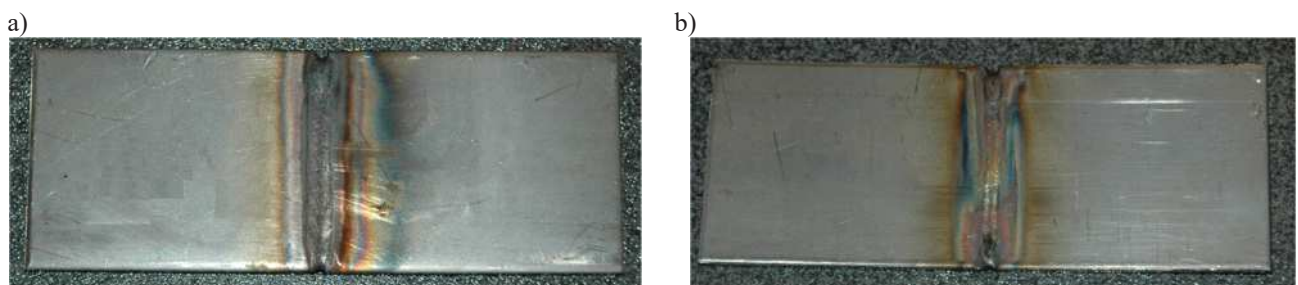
A view of the test butt joints B(5) of austenitic stainless steel AISI 304 sheets 2.0 mm welded by high power diode laser according to parameters given in Table 4; a) weld face, b) root surface
